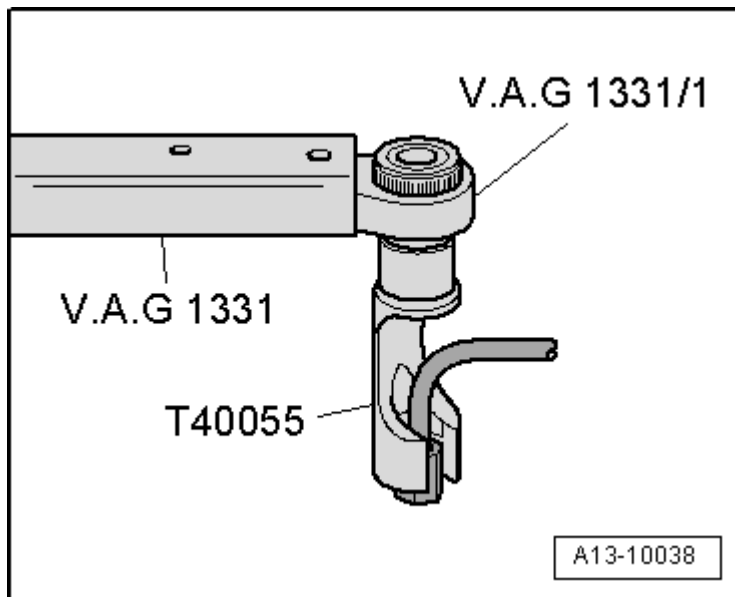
Identifying Torque Wrench V.A.G 1331T, Reversible V.A.G 1331/1 And Socket T40055
